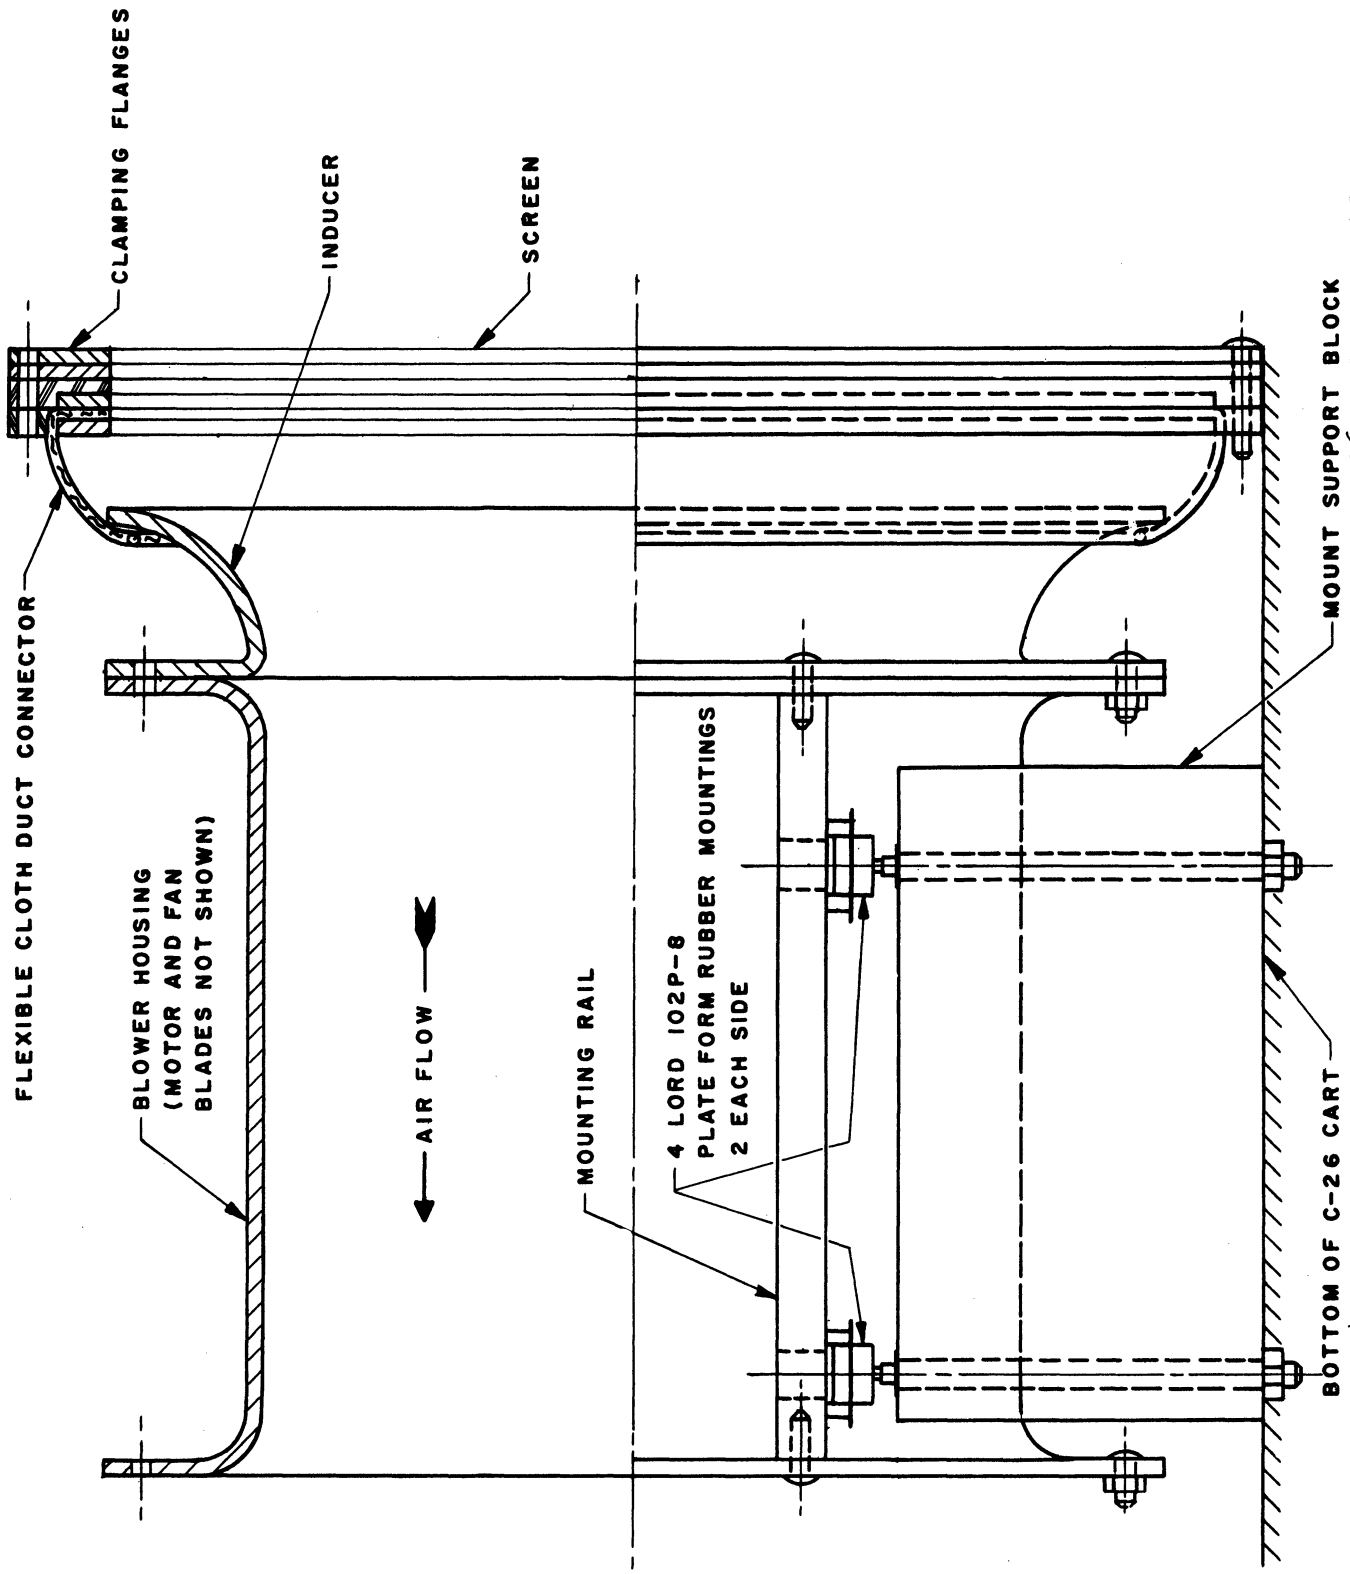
Half section, schematic of resiliently mounted C-26 cooling air blower.
